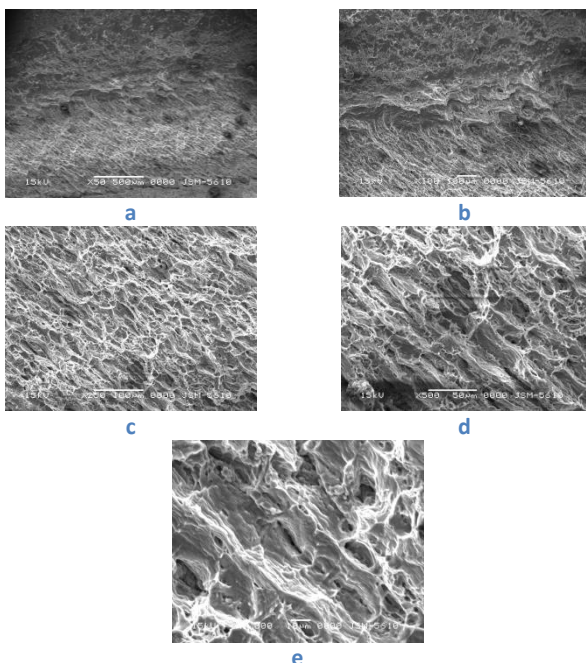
Fractrograph of weld sample prepared at 1070 rpm tool rotation speed and 78 mm/min welding speed a. 50x b.100x c.250x, d. 500x, e. 1000x magnification
